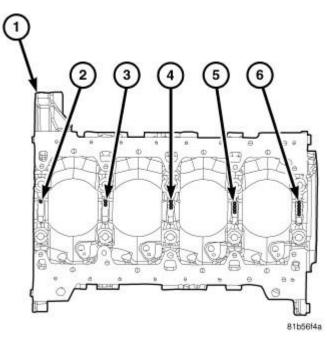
Crankshaft Cap Location Marks Courtesy of CHRYSLER LLC
